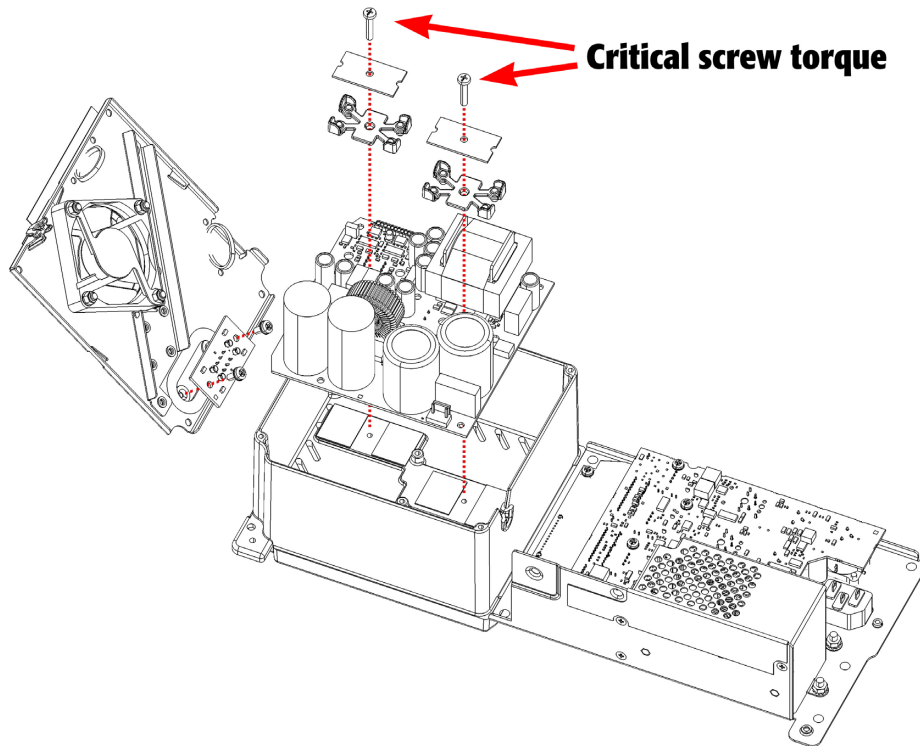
AMP/PSU removal and installation, including output board attached to metal cover.
